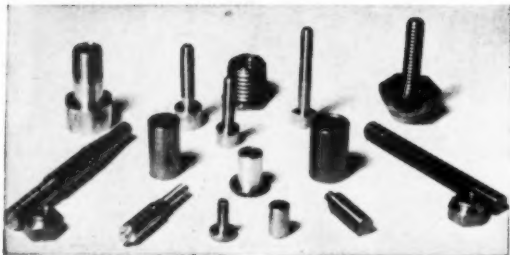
The installation shown in Fig. 6 produced the 17 parts shown here. Production rate is high and costs low when compared with machining these small parts in larger screw machines.
